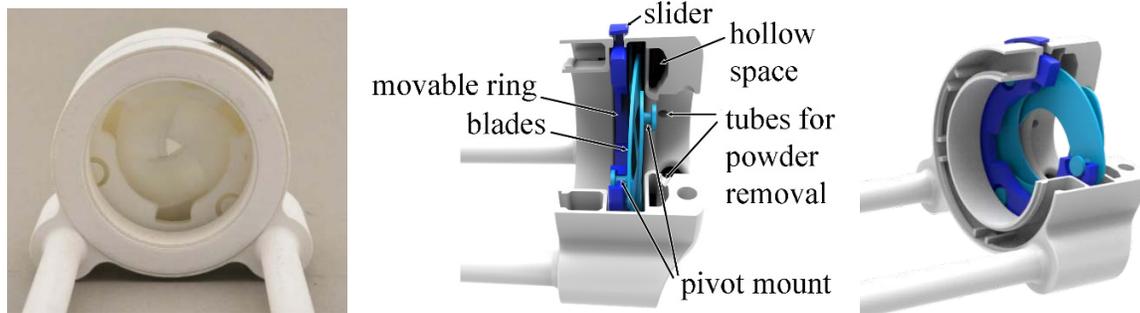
Aperture: manufactured in closed position (left), sectional view (middle/right)
